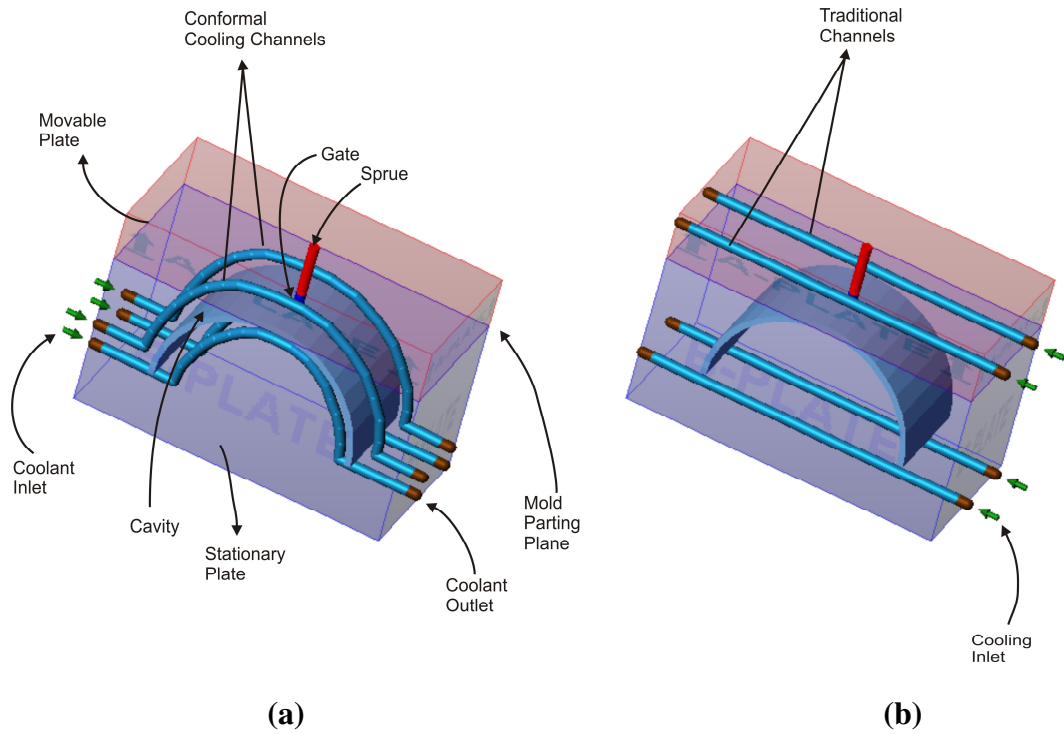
Closed mold with conventional cooling channels, closed mold with conformal cooling channels for the half cylinder shell production
